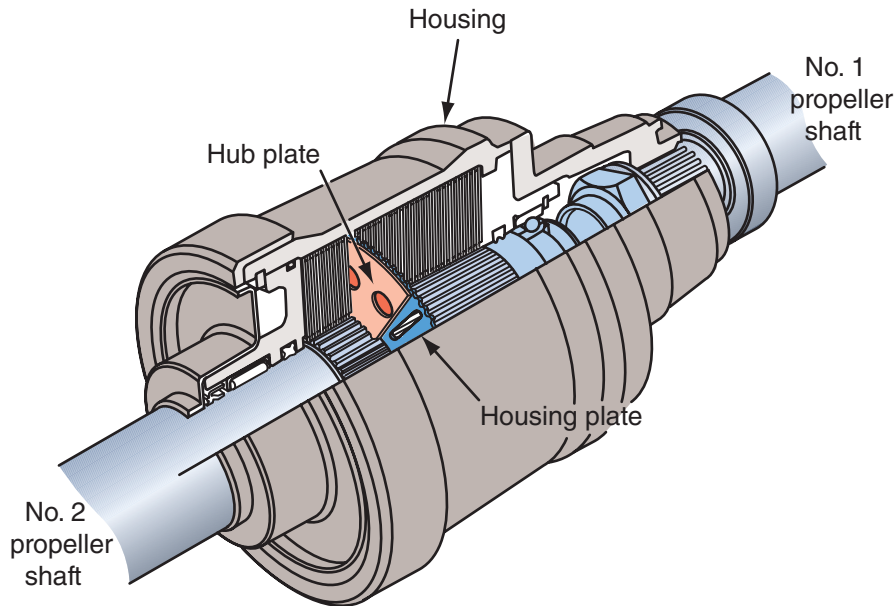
A viscous clutch is a sealed assembly with disc clutches submerged in a fluid.
